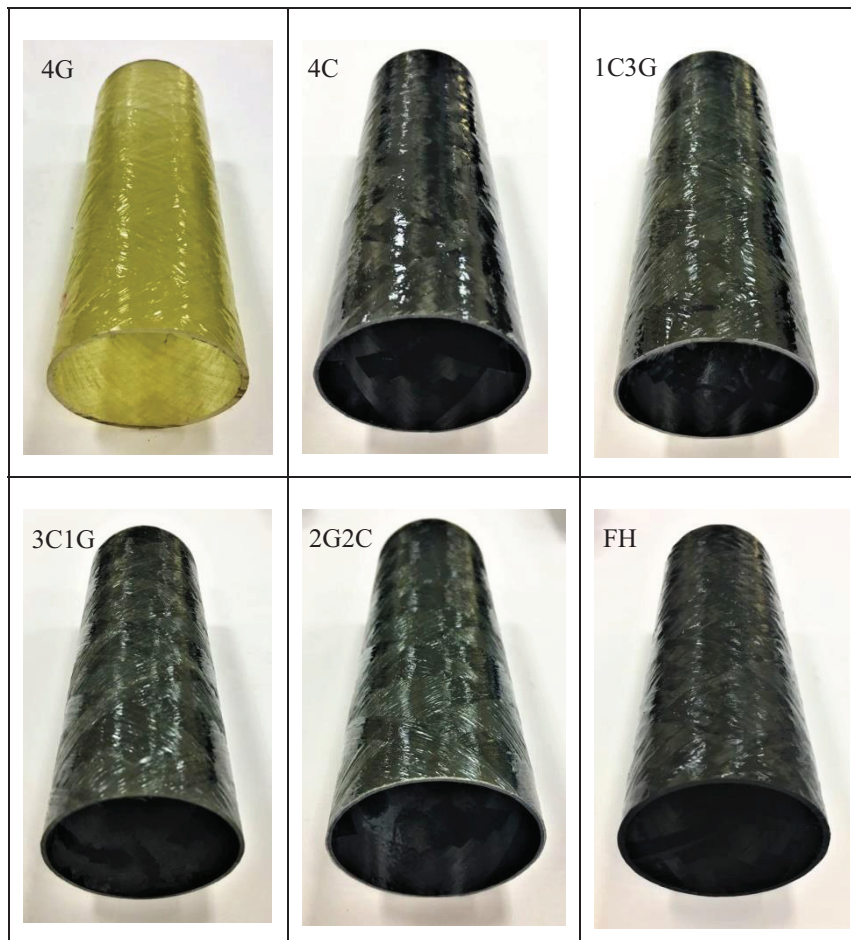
Radial test specimens which are sectioned from filament wound composite structures
